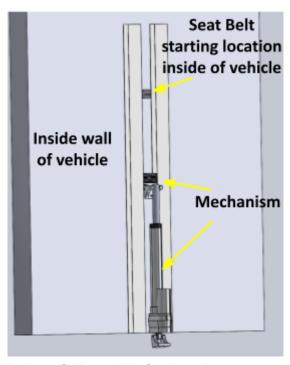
Preliminary CAD model of selected prototype (mechanism only)
